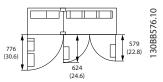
Space in front of IP21/IP54 enclosure type, frame size F12
